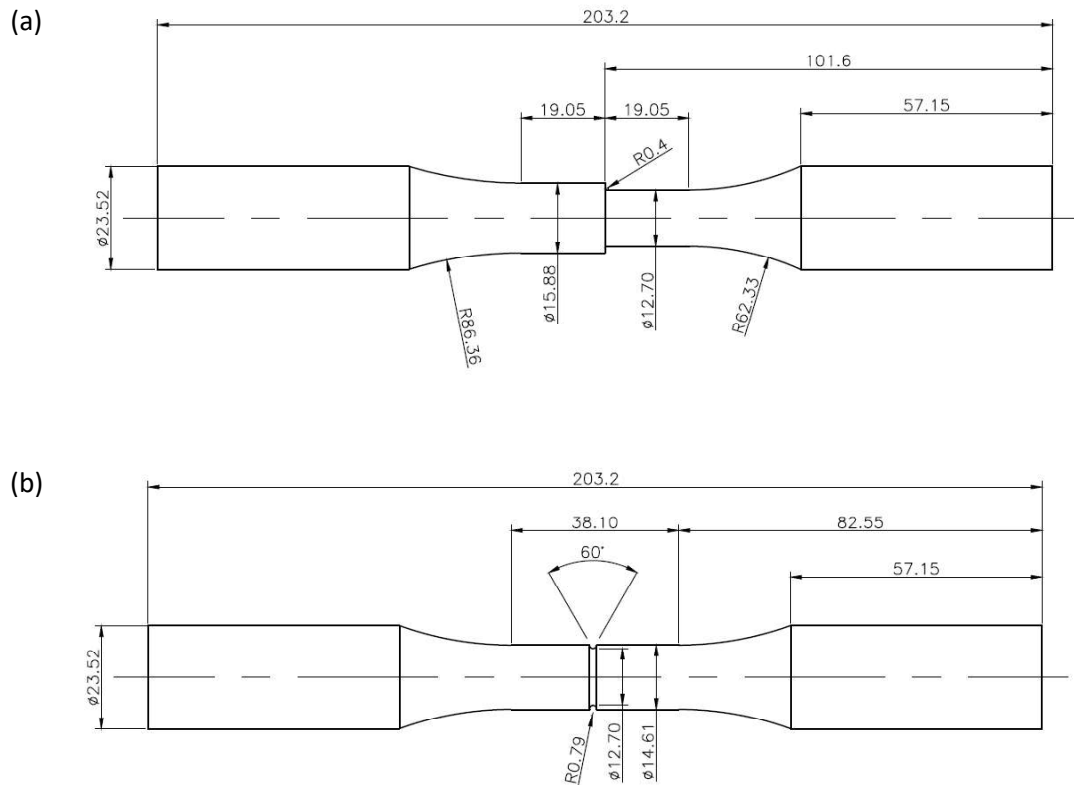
Specimen geometries and dimensions for (a) AISI 1141 steel stepped shaft specimen, (b) AISI 1141 steel grooved shaft specimen. All dimensions are given in mm.
